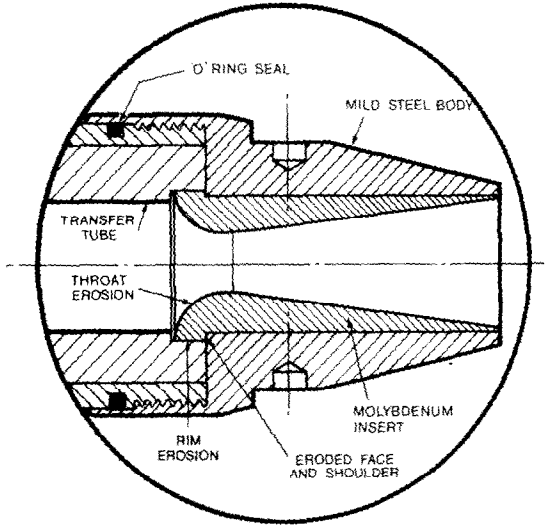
Details of the Mo insert in the nozzle assembly and the position of the various forms of erosion.
